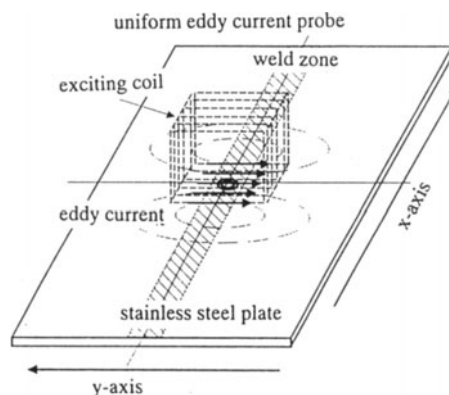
Uniform eddy current probe arranged perpendicular to the weld.
